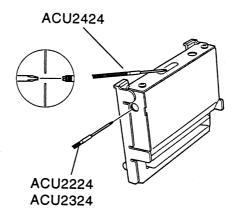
Clearing a Paper Jam in the Paper Cutter (1)
